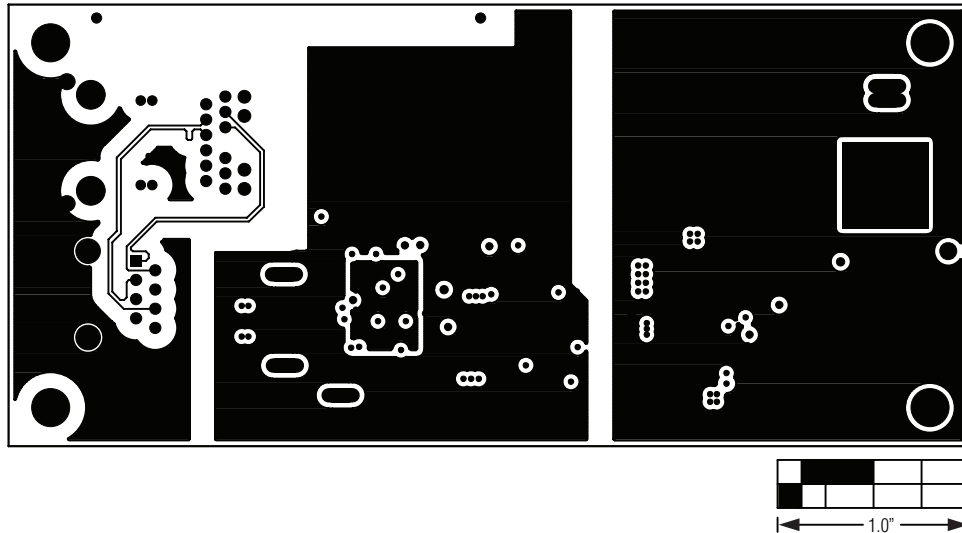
MAX5974C EV Kit PCB Layout—GND Layer 2
